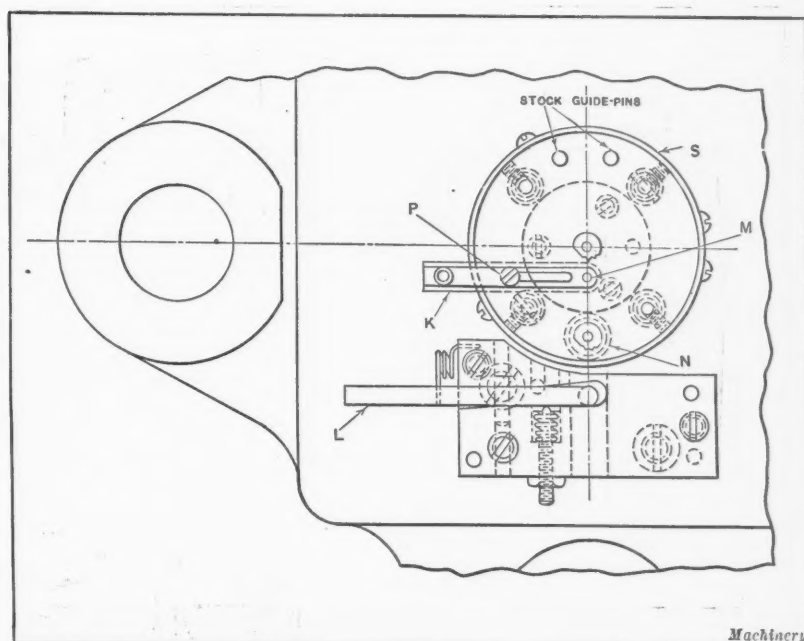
Plan View of Punch and Automatic Stop used in making Part shown in Fig. 2
